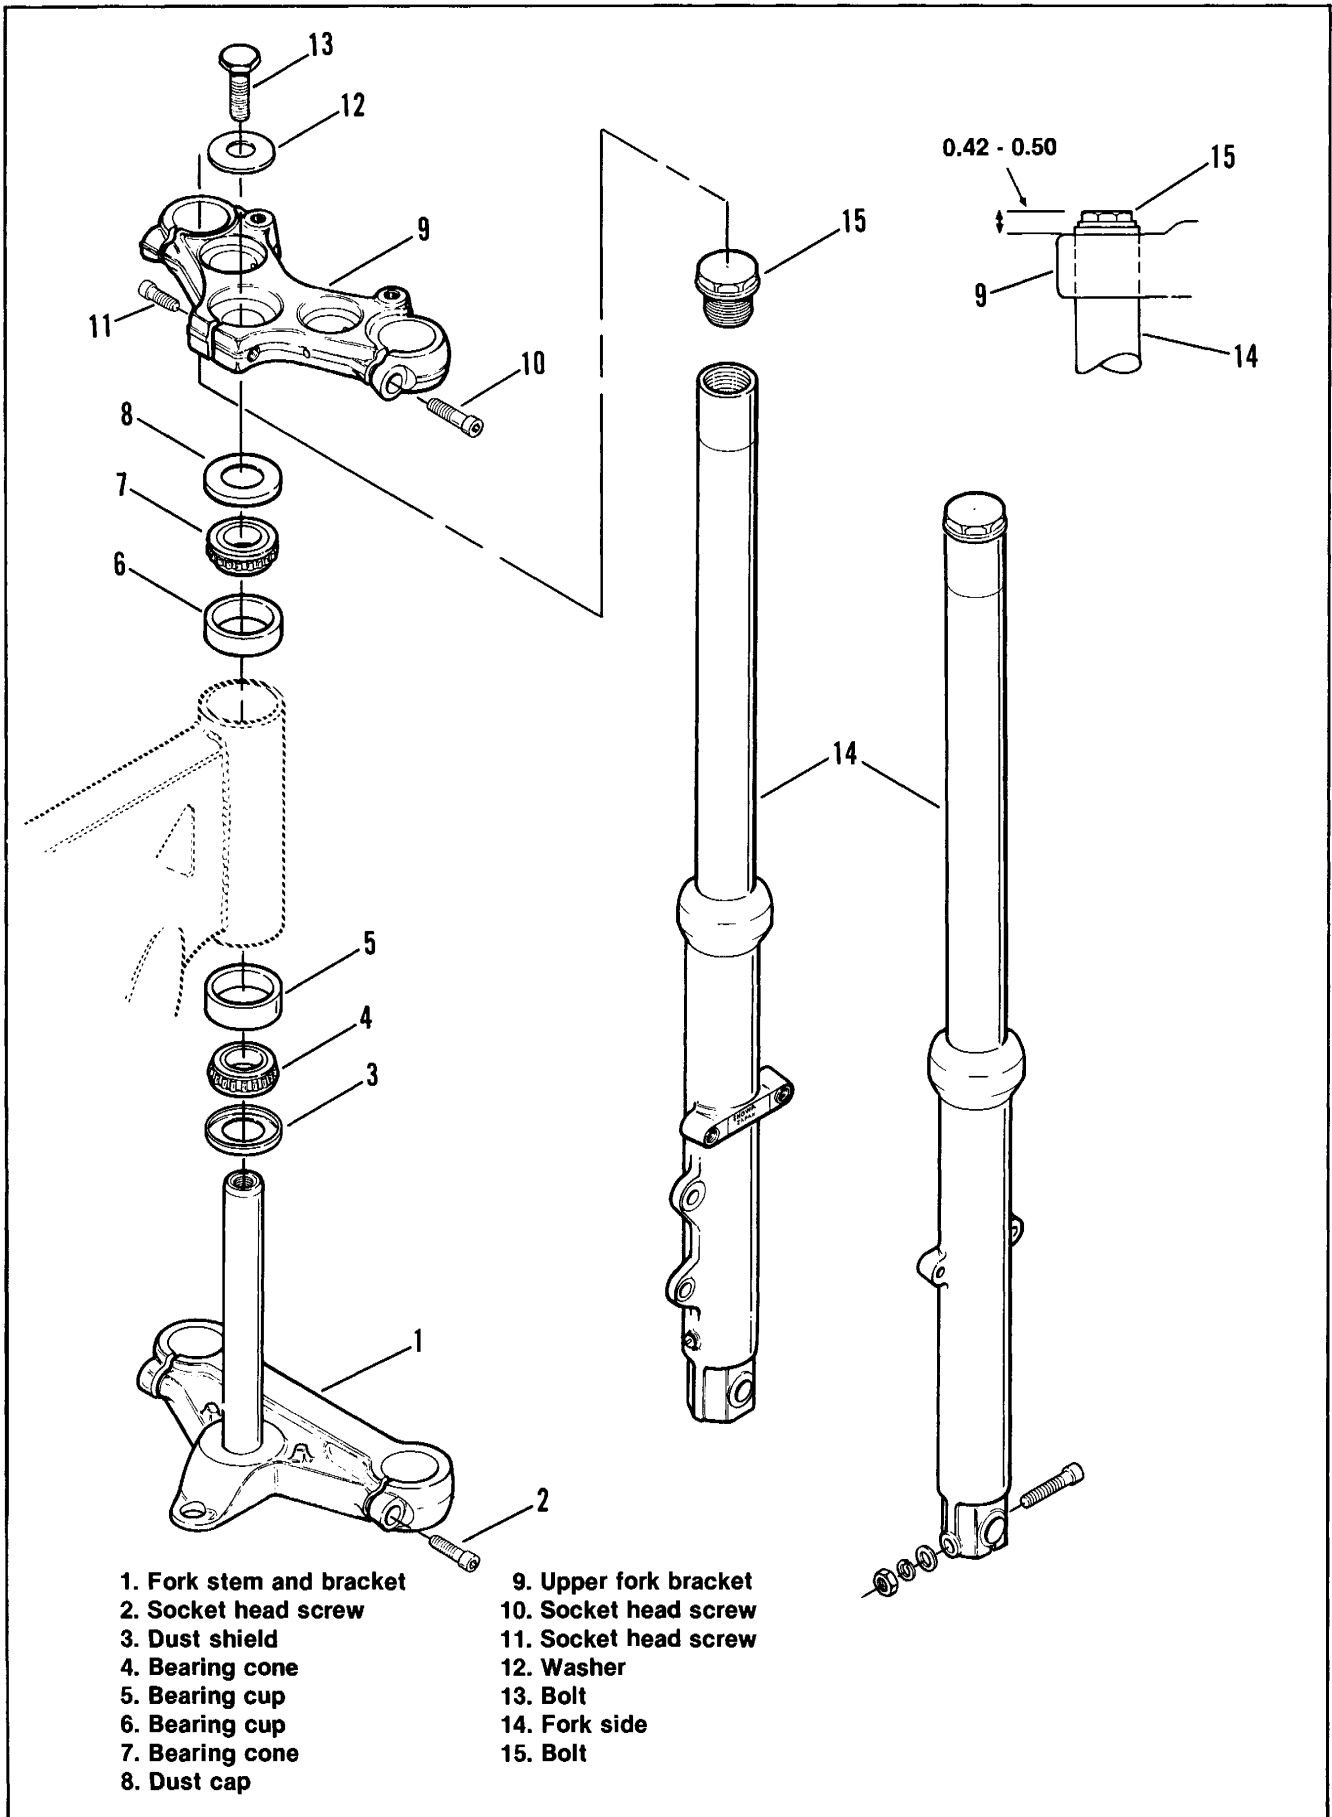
Front Fork Assembly — 1987 FXLR, FXRS Sport Edition, All 1988-1990 FXR Models
